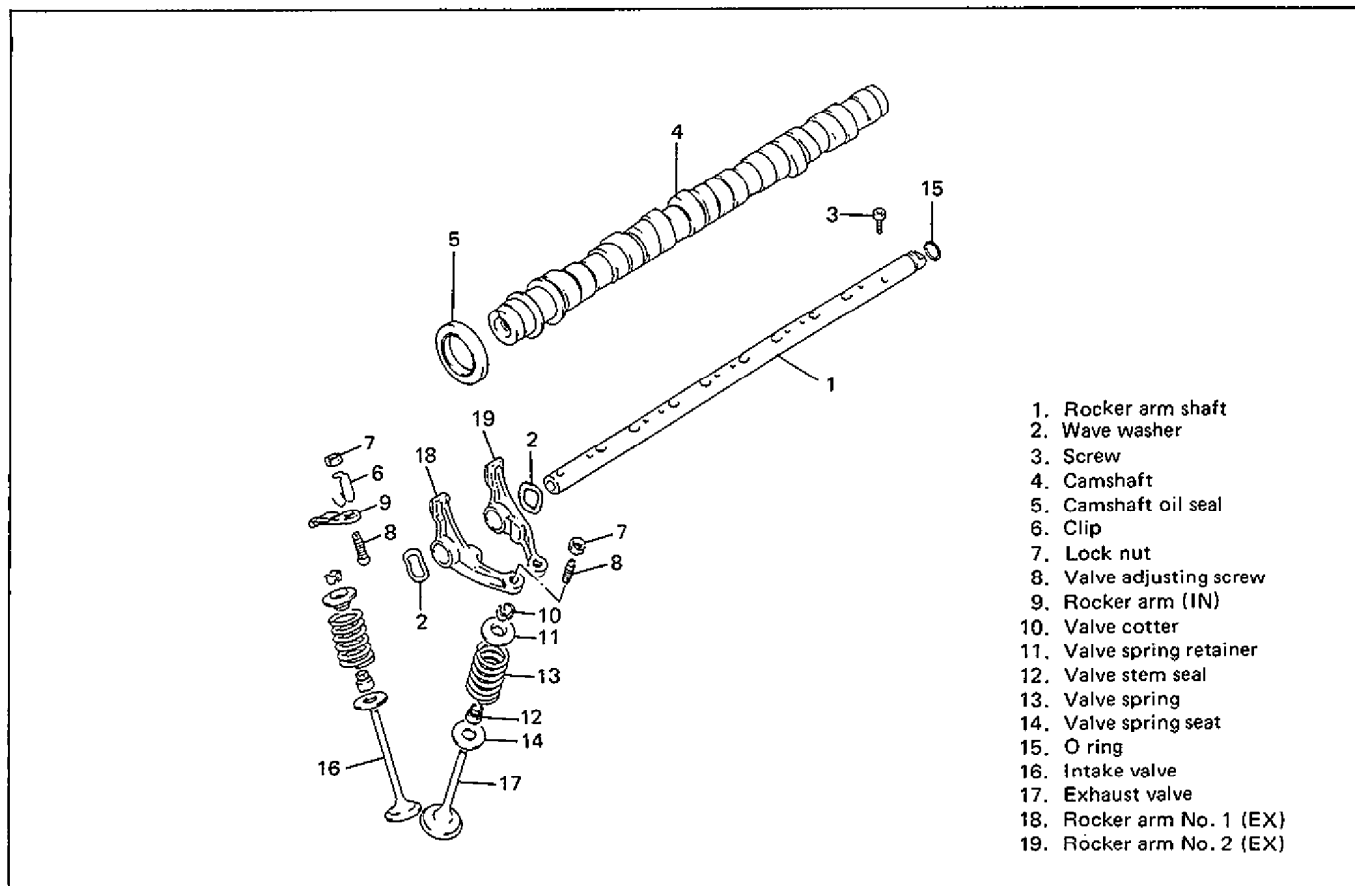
A-55 Rocker Arms, Rocker Arm Shafts, and Camshaft, etc.
